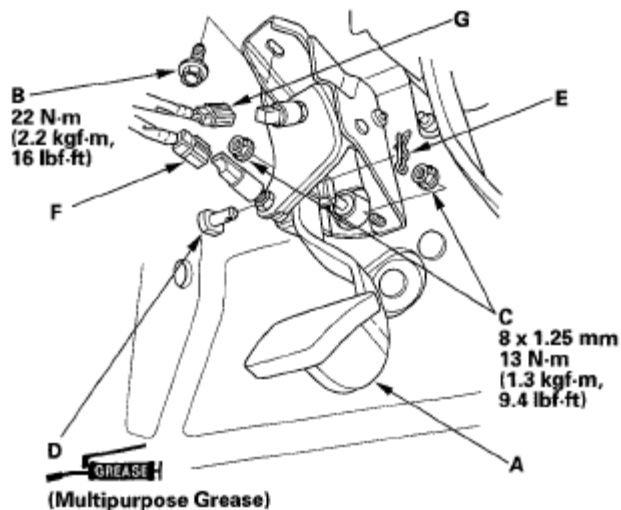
Identifying Lock Pin And Clutch Pedal Mounting Bolt With Torque Specifications
